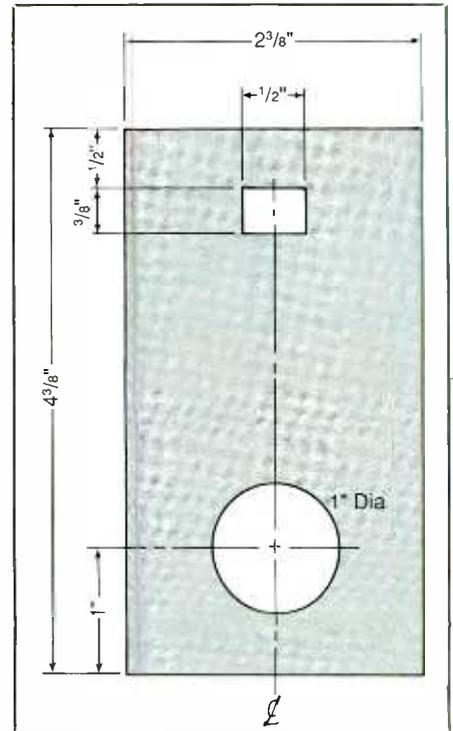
Fabrication details for front panel of specified enclosure. If you use an enclosure that has different dimensions, make suitable adjustments in machining details.
